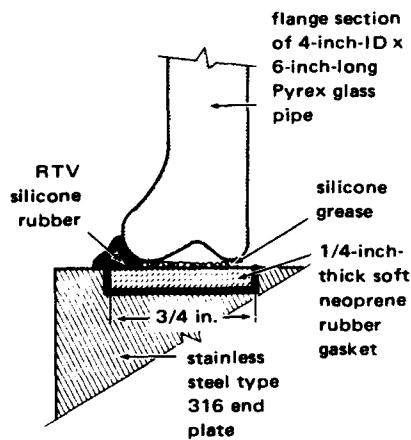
Experimental sealing and bearing system utilizing a 1/4-inch-thick captive neoprene washer between the glass pipe end flange and the metal end-closure plate.
